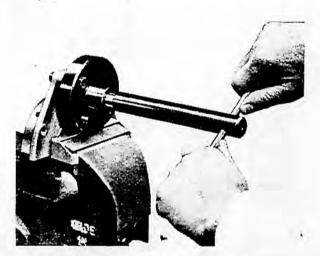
REAMING OIL PUMP SPINDLE BUSH. SERVICE TOOL MF147
